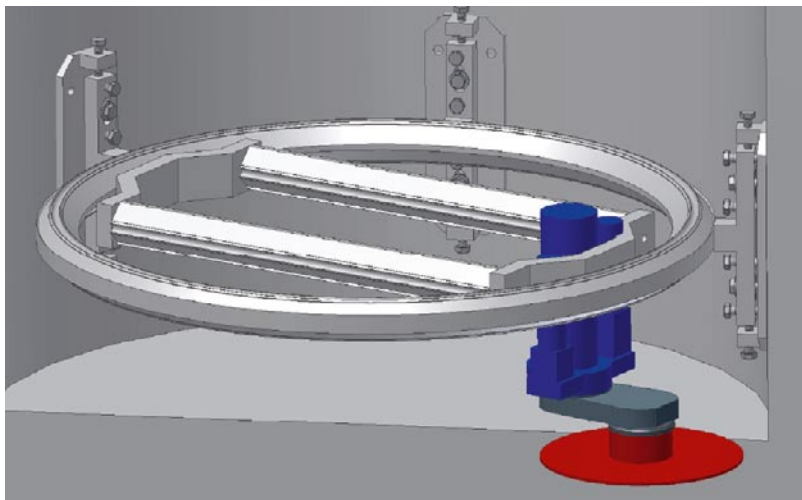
Proposed equipment for smoothing rock and concrete.
